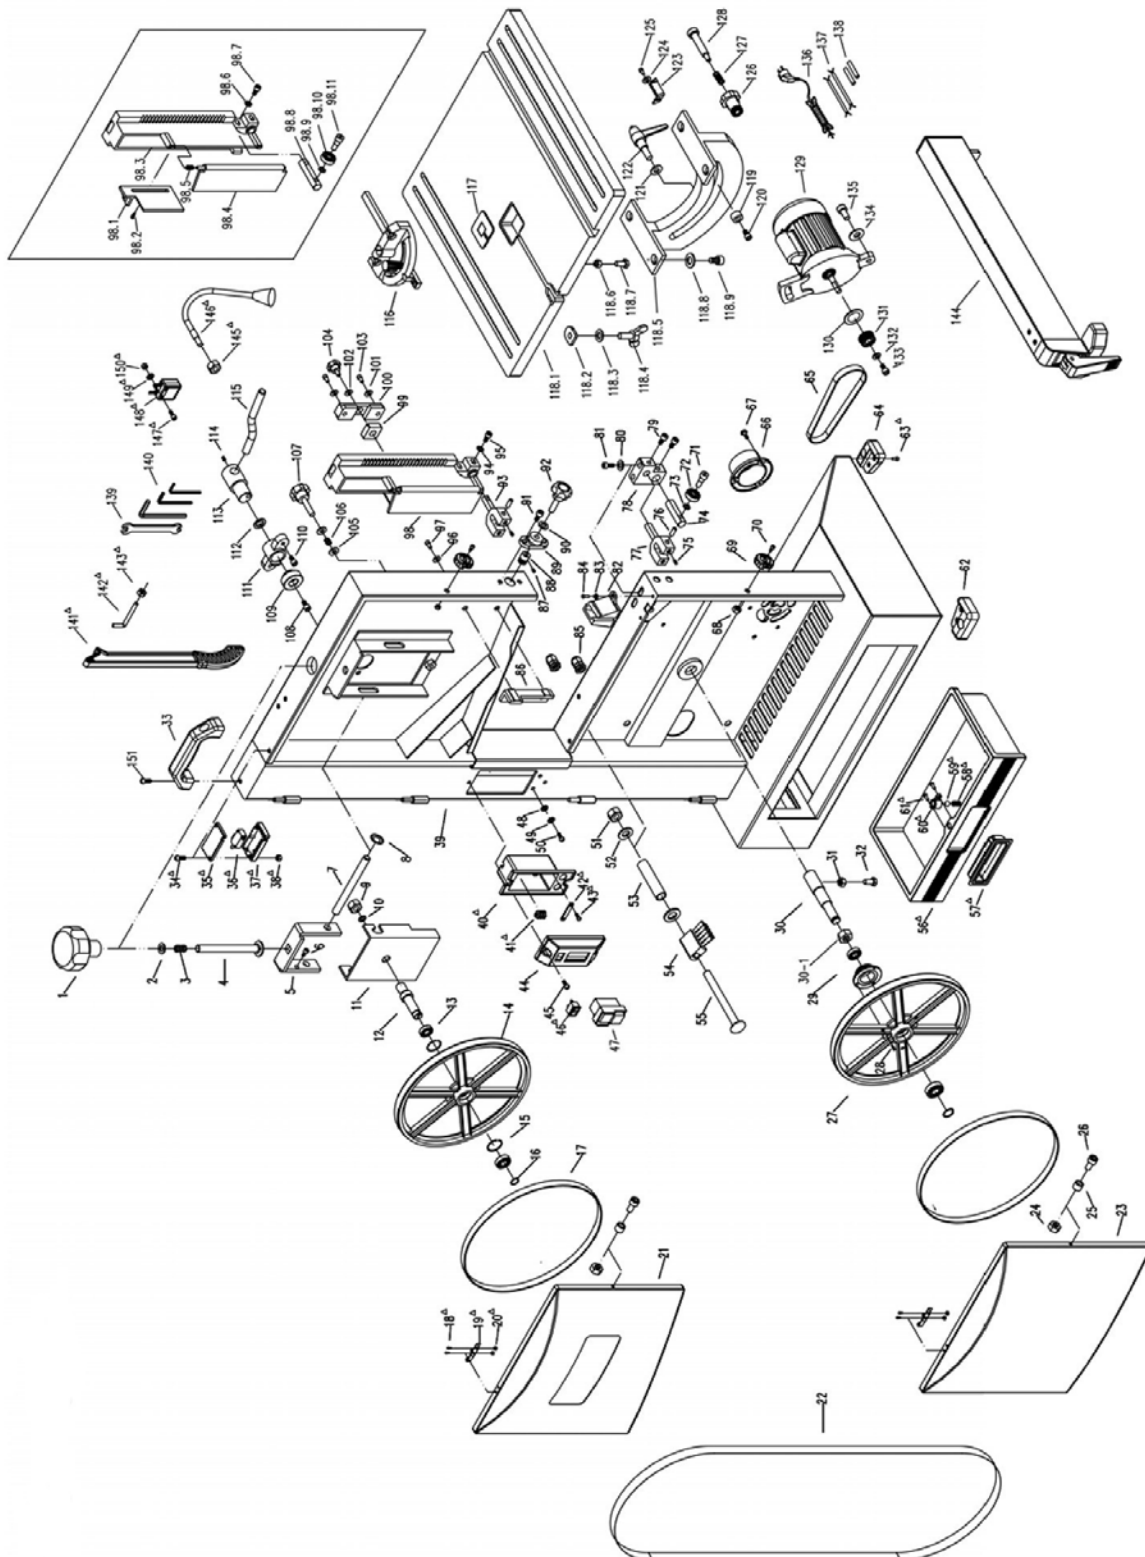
Spare parts drawing 1 - Wood Band Saw HBS 231-1
